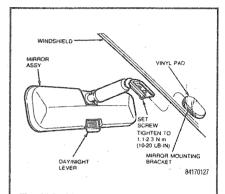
Inside rear view mirror installation—1988–91 vehicles
